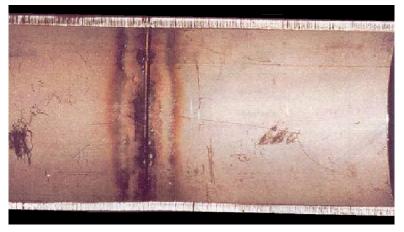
Crevice in weld because both tube ends are not sufficiently pushed together. (Eastwood et al., 1993).
